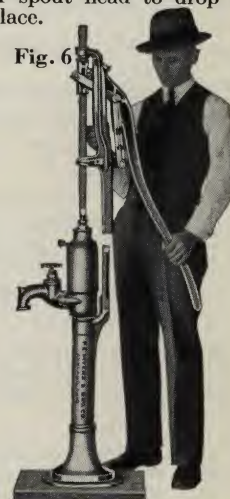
The Sixth operation consists of placing the handle fulcrum over the windmill bar and into position ready for the cap screws, completing the job.
